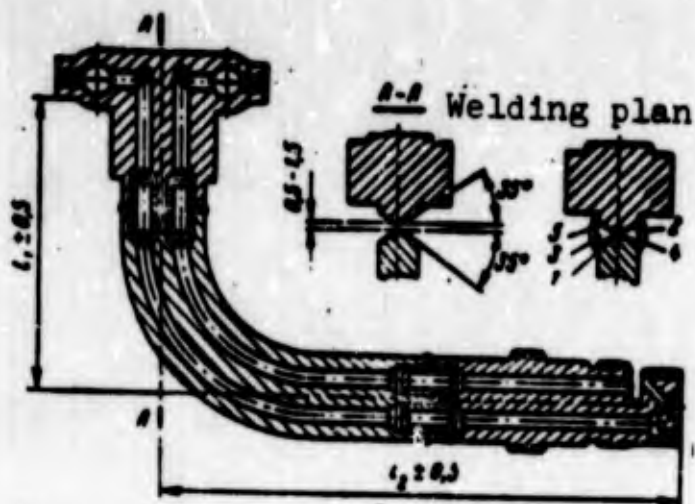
Diagram of welding of the casing of a two-duct injector. 1-5) order of applying seams.
